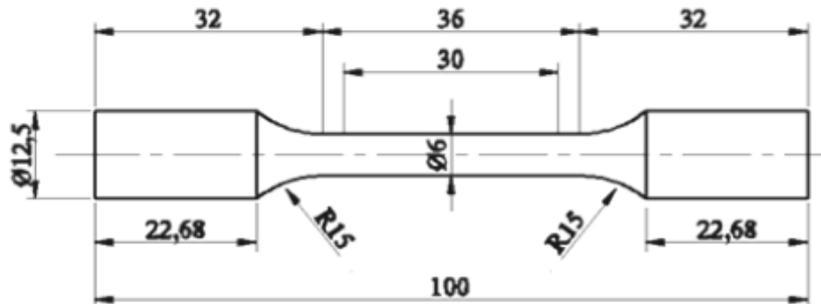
Dimensions of standard (TS 138-A) tensile test samples
